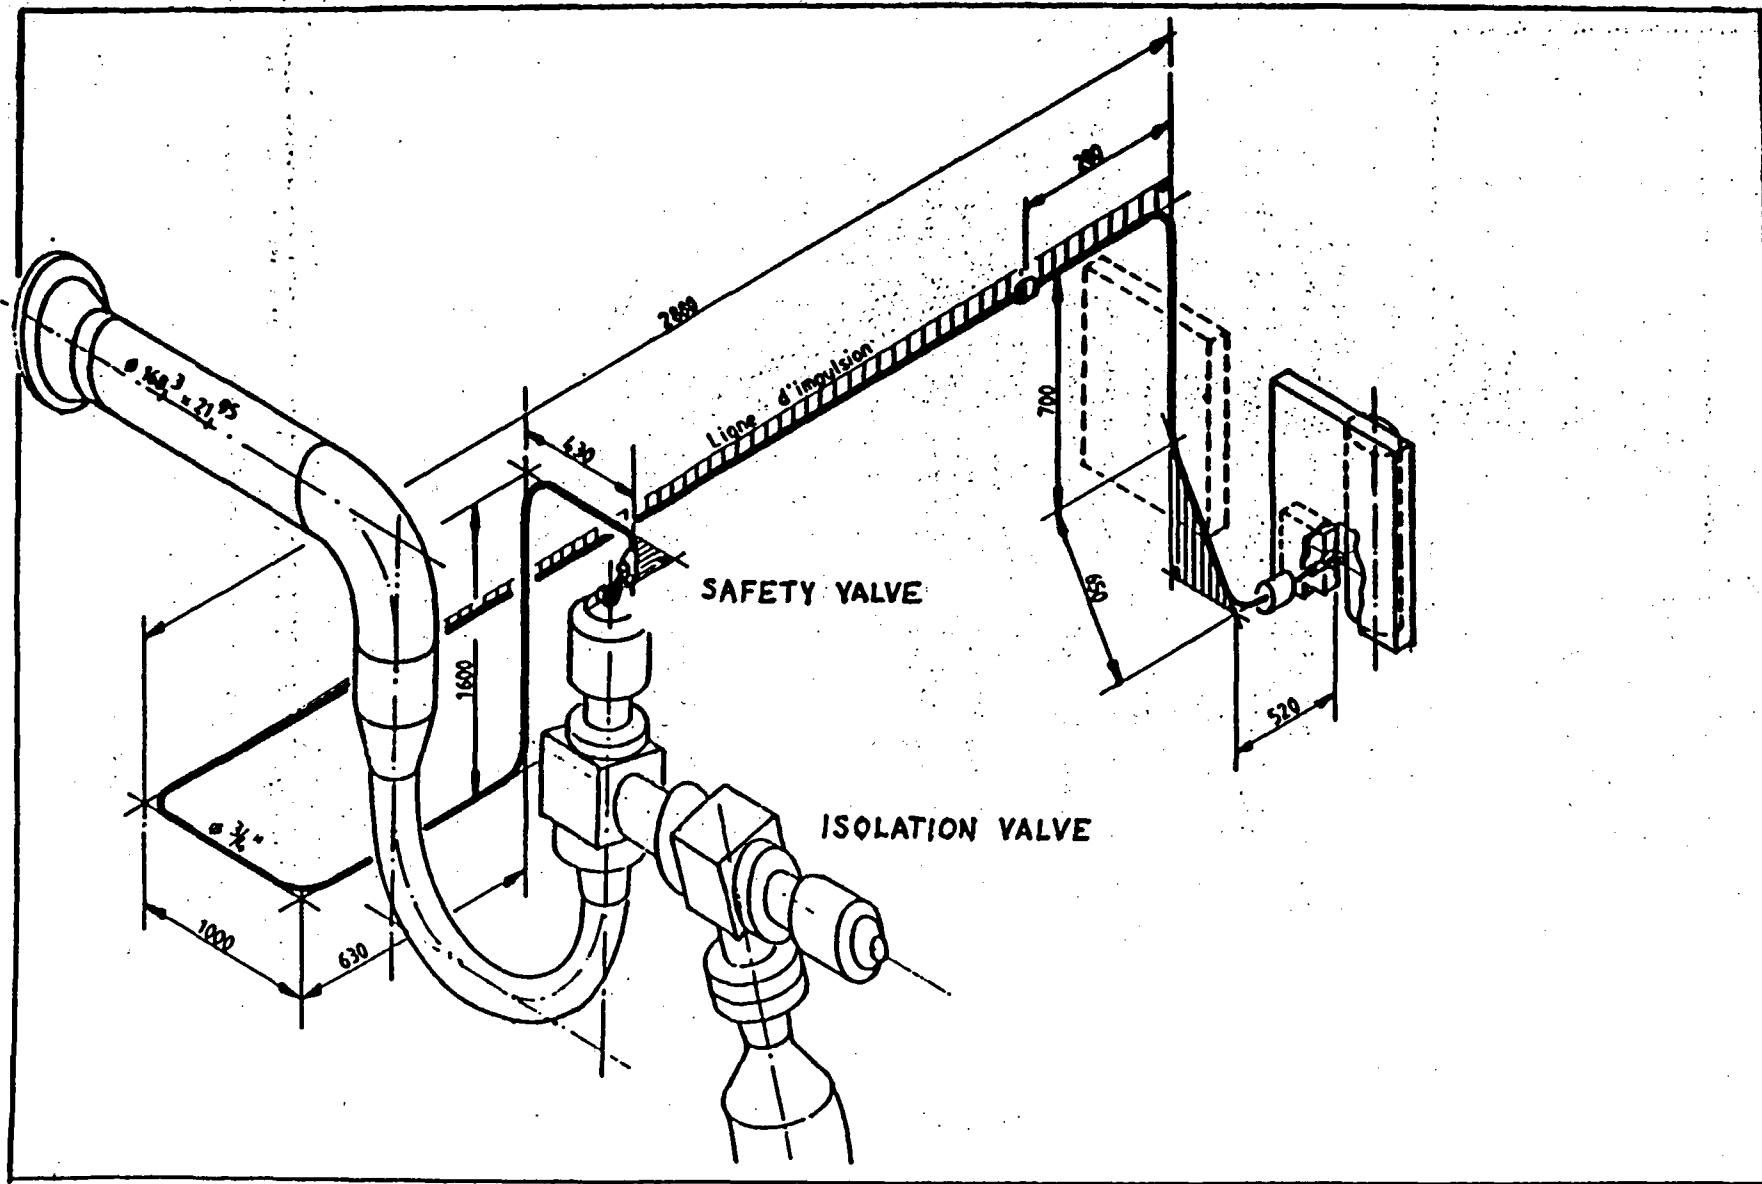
LAYOUT OF INSTRUMENTATION IN TEST SECTION
